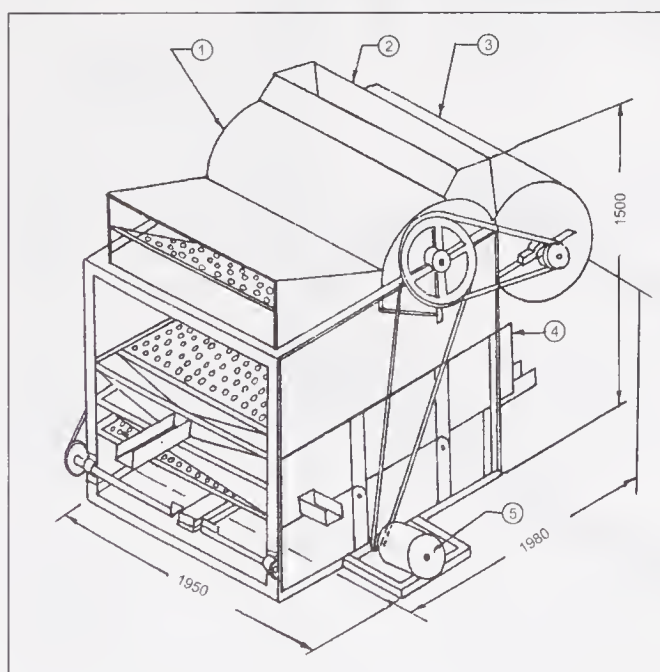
'APAU' power operated castor decorticator. 1, Cylinder cover; 2, Feeding hopper; 3, Blower Assembly; 4, sieve assembly; 5, Motor.
